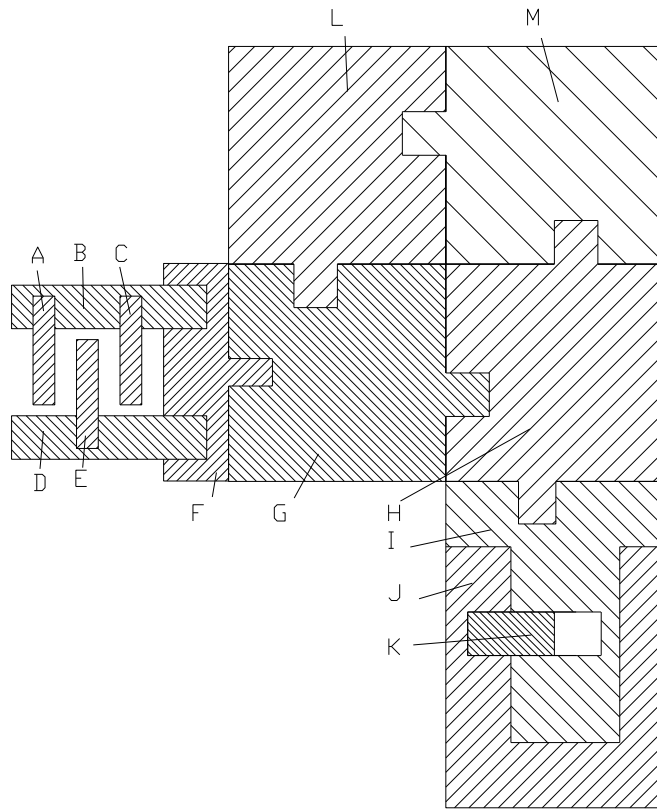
A product that can be assembled with a NC-S-NL-NM assembly
